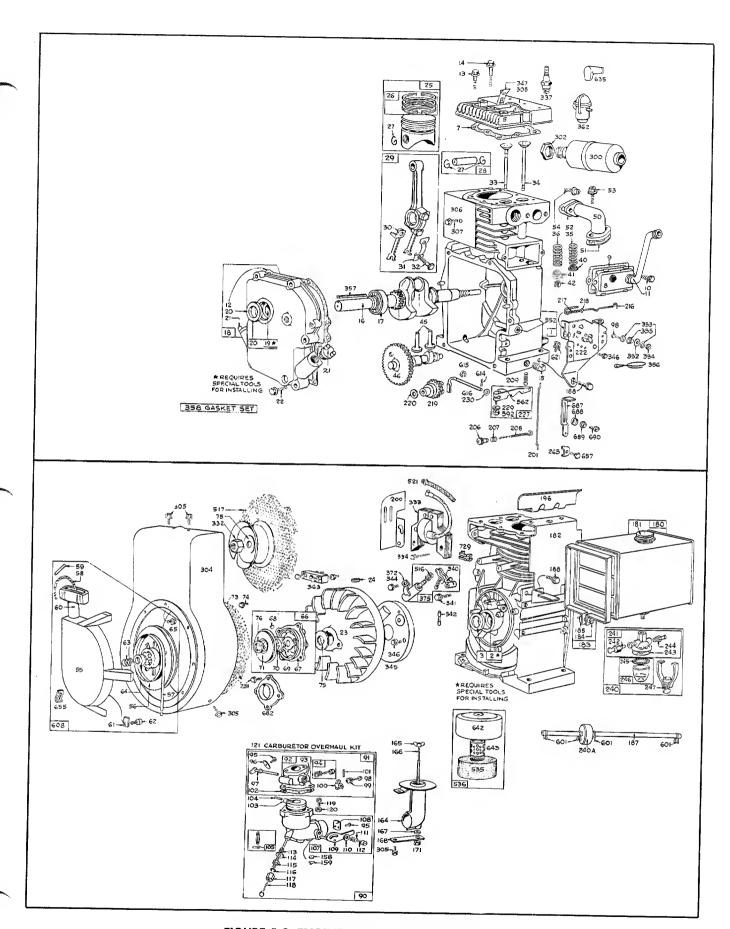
ENGINE MODEL 190402-0689-01
